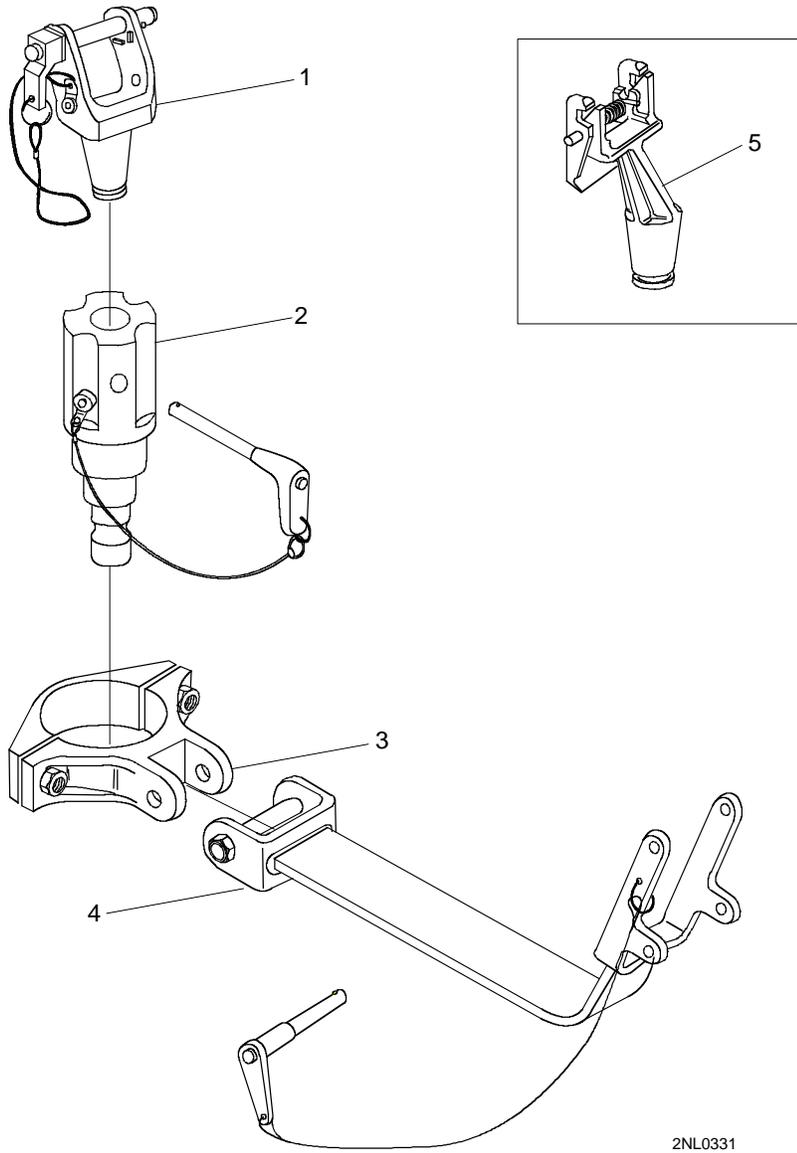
M197 Machine Gun Mount, PN/N 12956264
